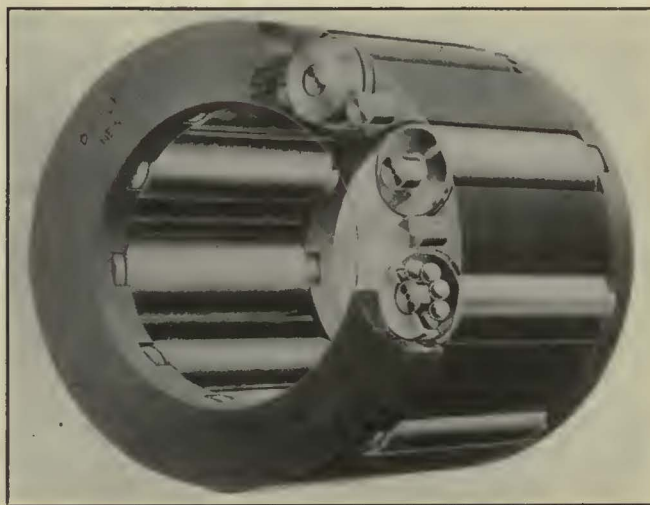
PERKINS DESIGN OF ROLLER BEARINGS
